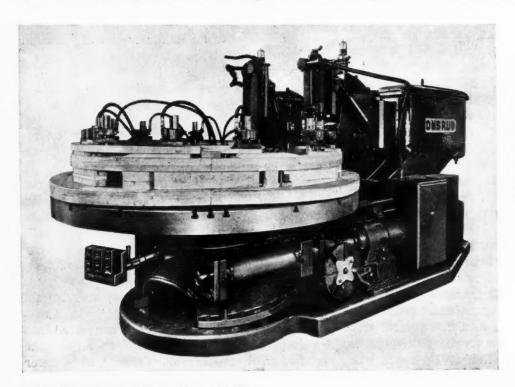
Automatic Shaper with Electronic Motor Drive. A Follower Mechanism Traces the Outline of a Model and Changes the Rotating Speed of the Table so that Constant Peripheral Speed of the Irregular-shaped Workpiece is Obtained
